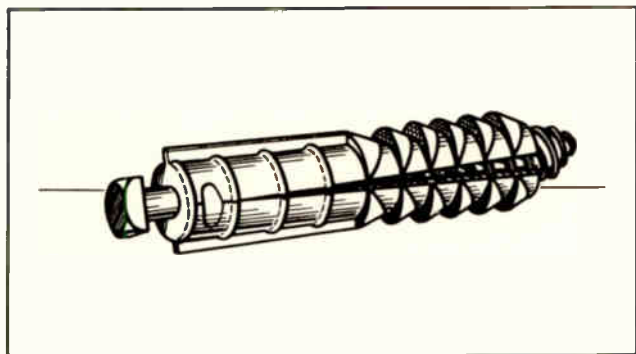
An Expansion Shield often used with Wood Screws and Lag Screws.
